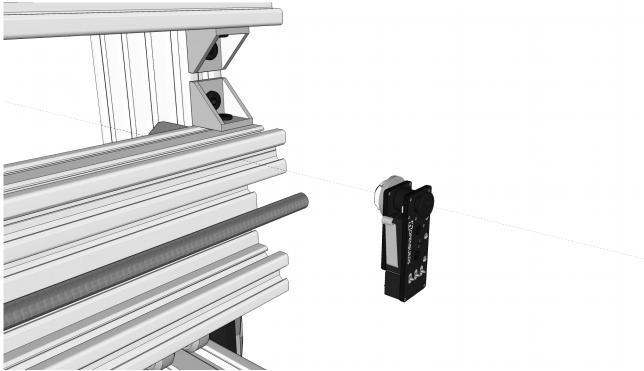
LEAD CNC Machine 1515 Disassembly: Remove X-Axis Xtension Limit Switch
